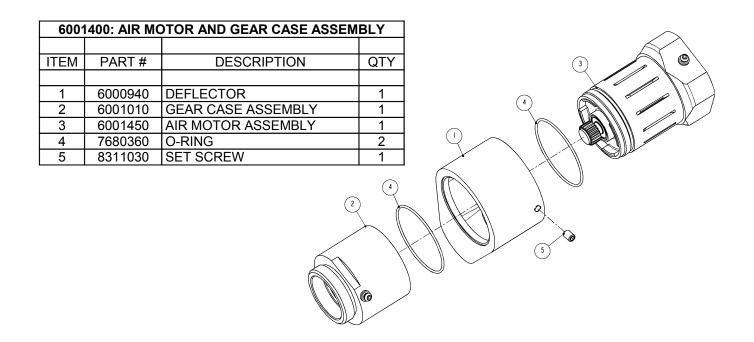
AIR MOTOR AND GEAR CASE ASSEMBLY
